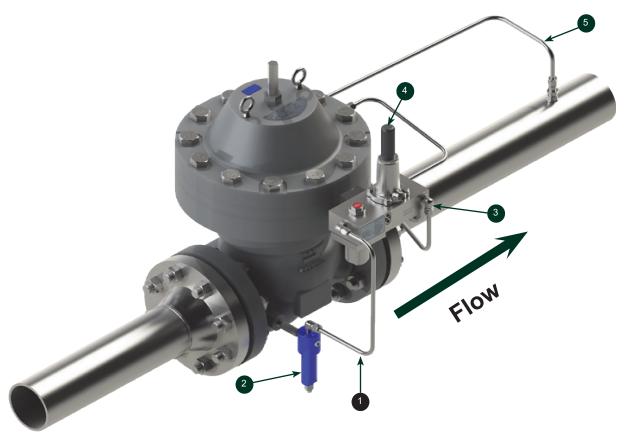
Loading Type Valve (Pressure Reducing Valve)
